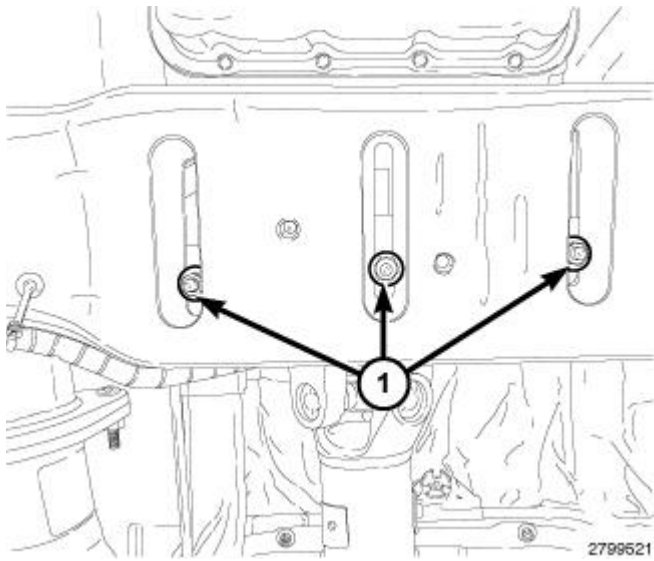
Identifying Rear Transmission Mount To Crossmember Nuts - AS68RC A/T
